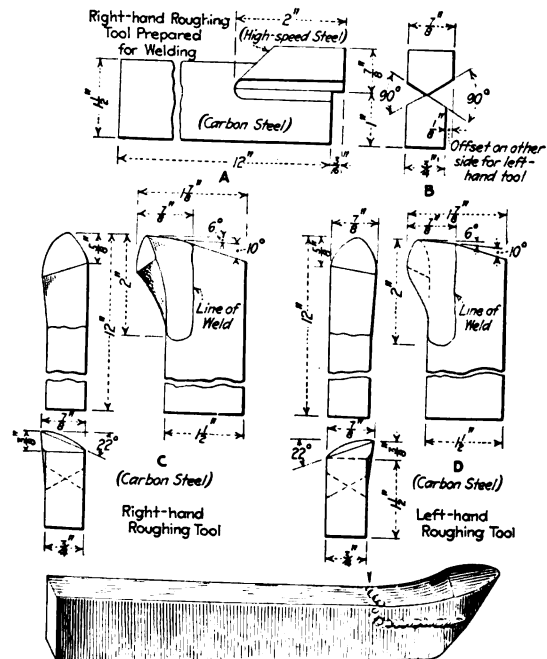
DETAILS OF TOOL WITH OXYACETYLENE-WELDED POINT
